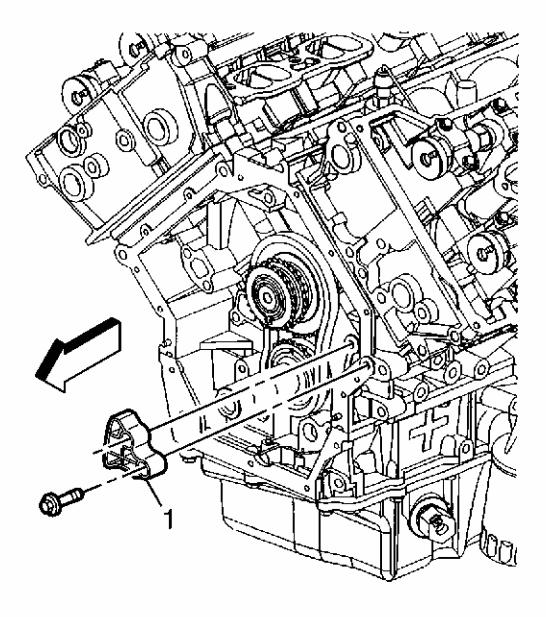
Locating Primary Camshaft Drive Chain Guide & Bolts Courtesy of GENERAL MOTORS CORP.
